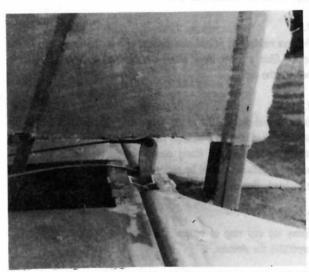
Stabilizer located and glued in place, elevator tab push-pull assembly installed.
